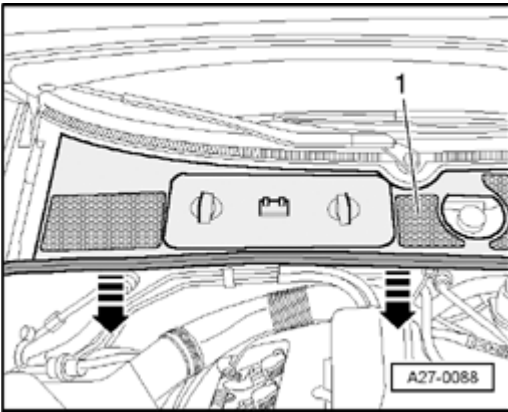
Identifying Plenum Chamber Cover & Removing Rubber Seal
